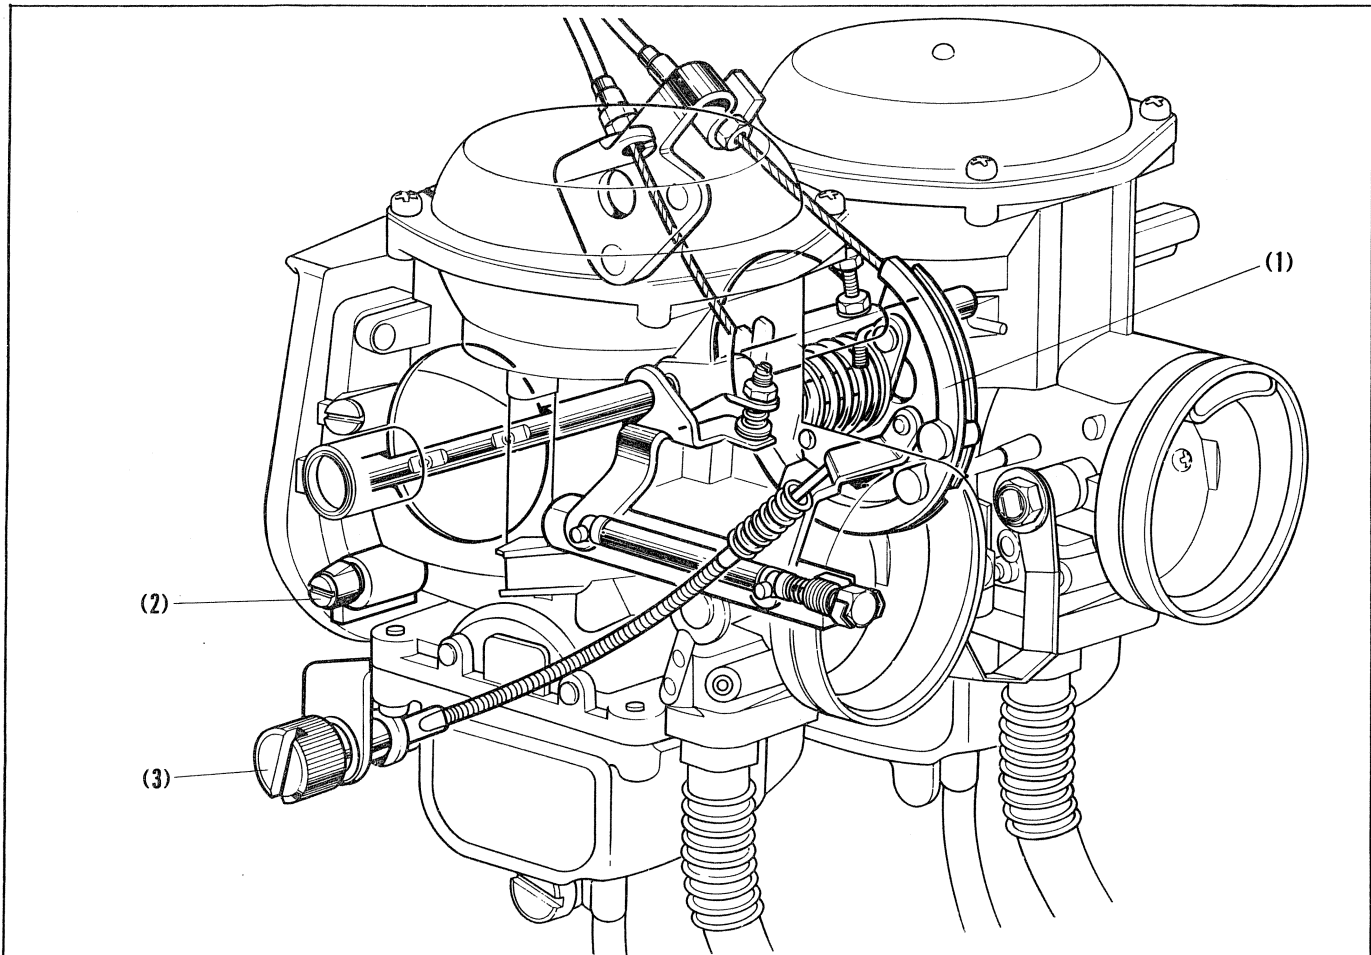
(1) Throttle lever (2) Idle limiter (3) Throttle stop screw
